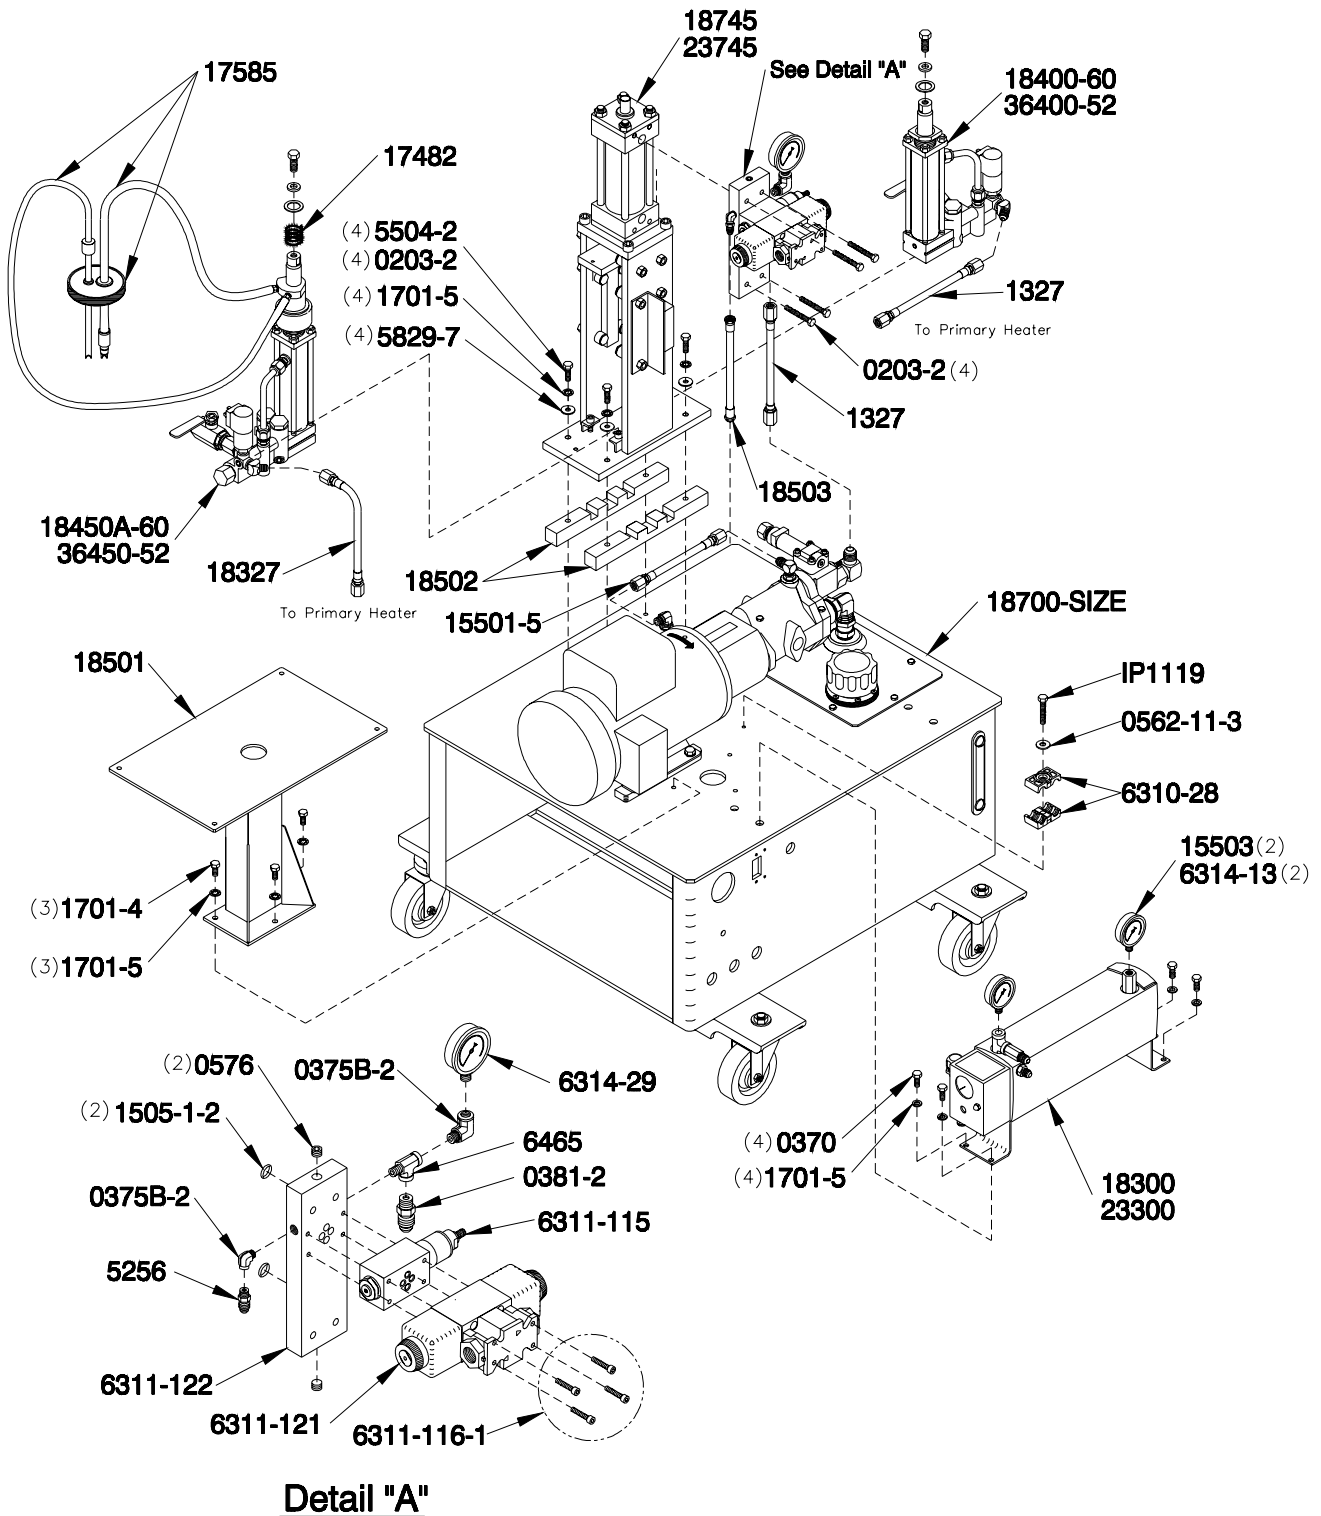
Base Assembly, (Part No. 18500-SIZE, 23500-SIZE), Exploded
